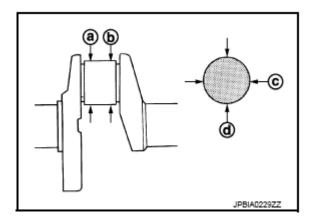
Identifying Crankshaft Out-Of-Round And Taper Area Courtesy of NISSAN NORTH AMERICA, INC.
